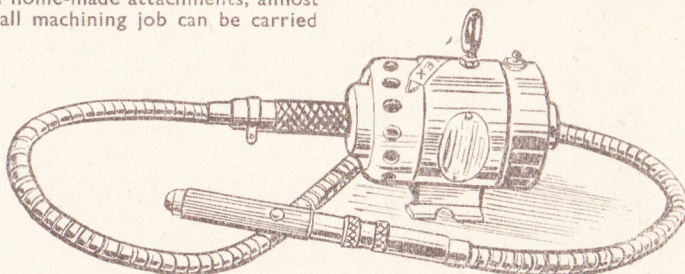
The type of machine which is ideal for model maker and home mechanic
